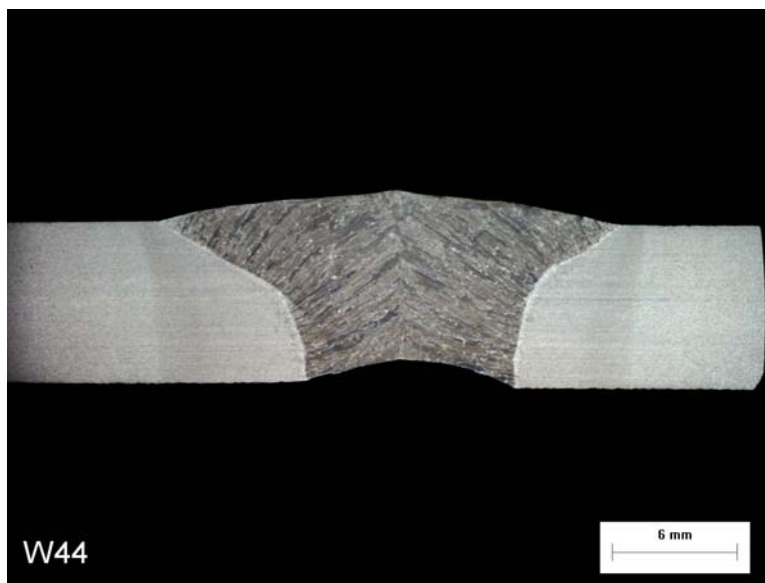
Weld with Typical Root Bead Suck-Back
